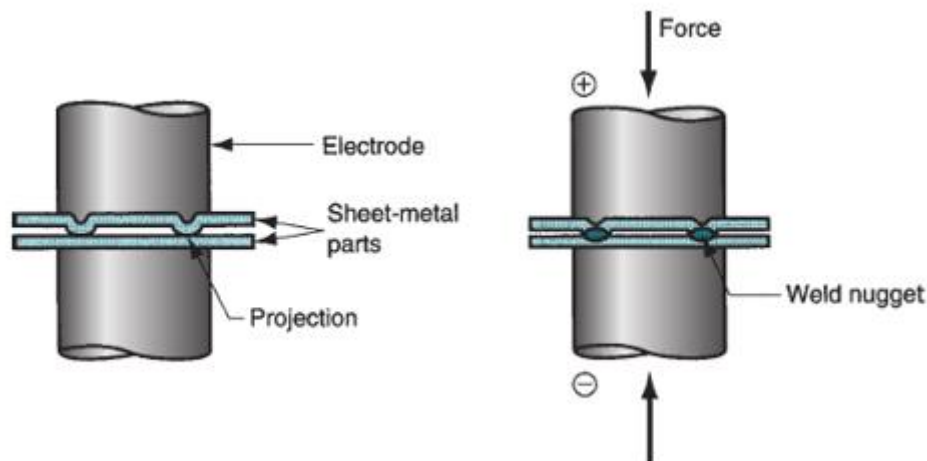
Resistance Projection Welding Operation [3]
